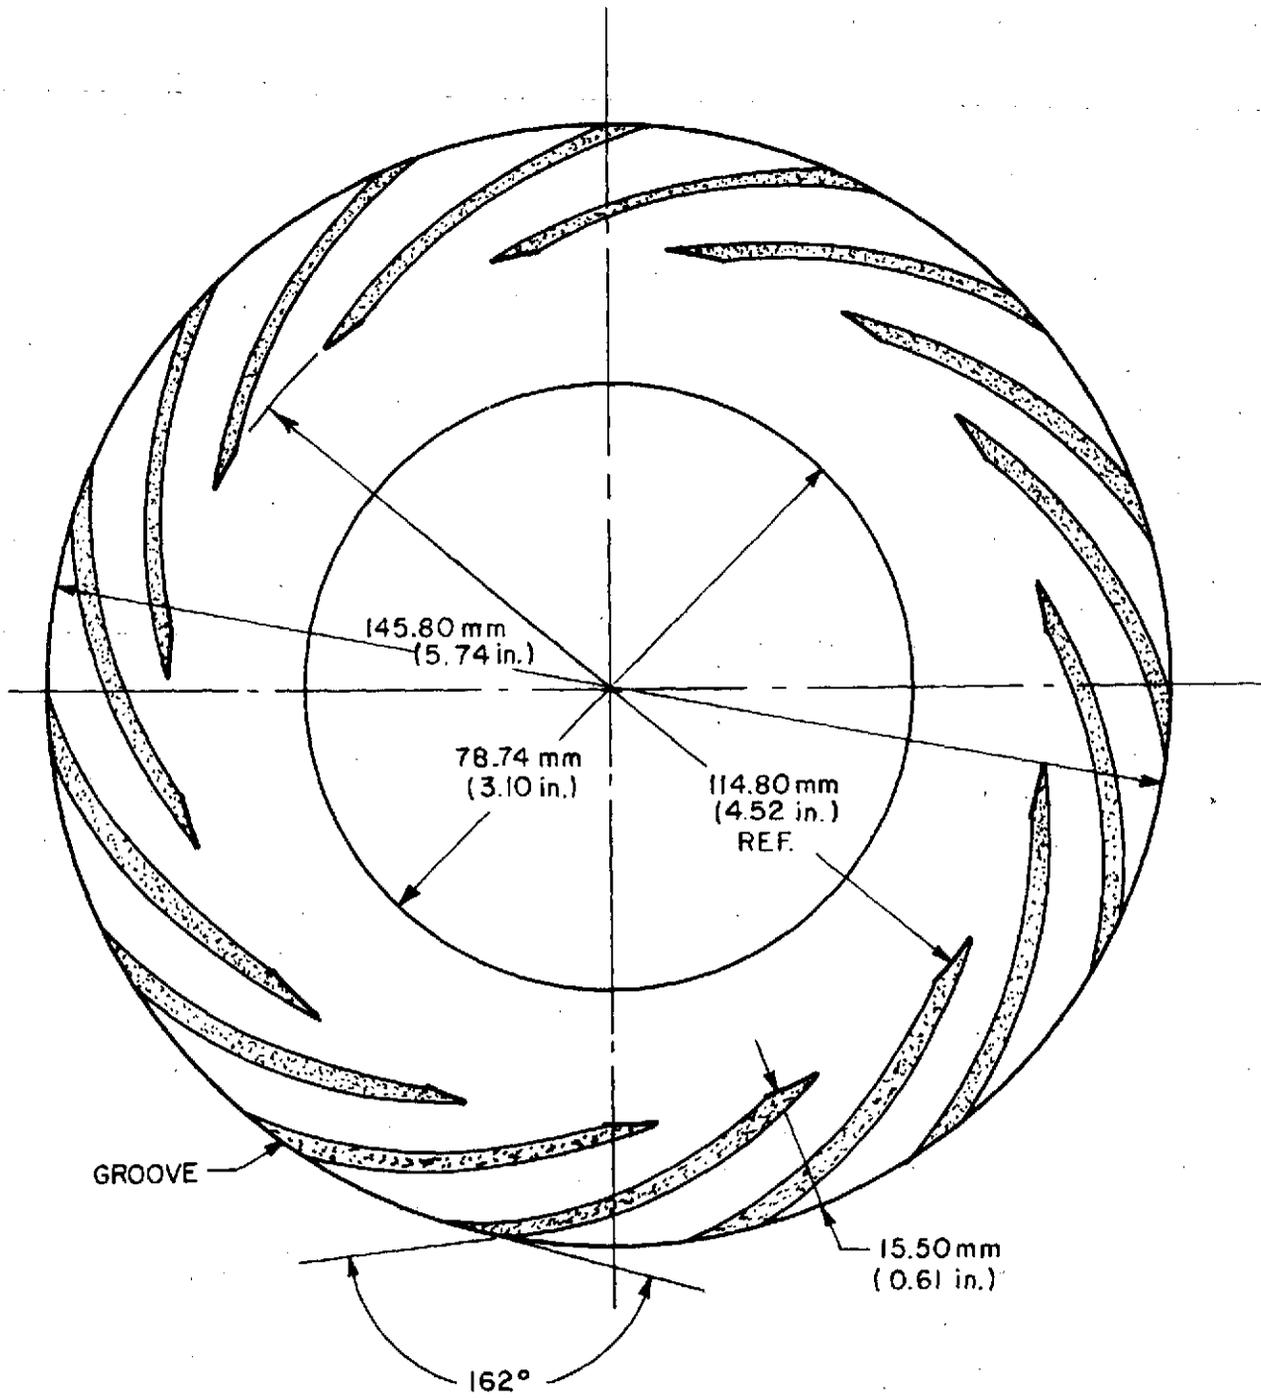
Spiral Groove Thrust Bearing Geometry
